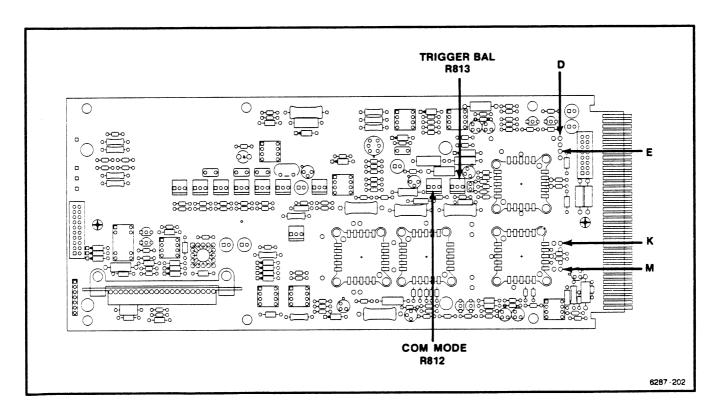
A1 Main board Trigger Balance test point and adjustment locations.
